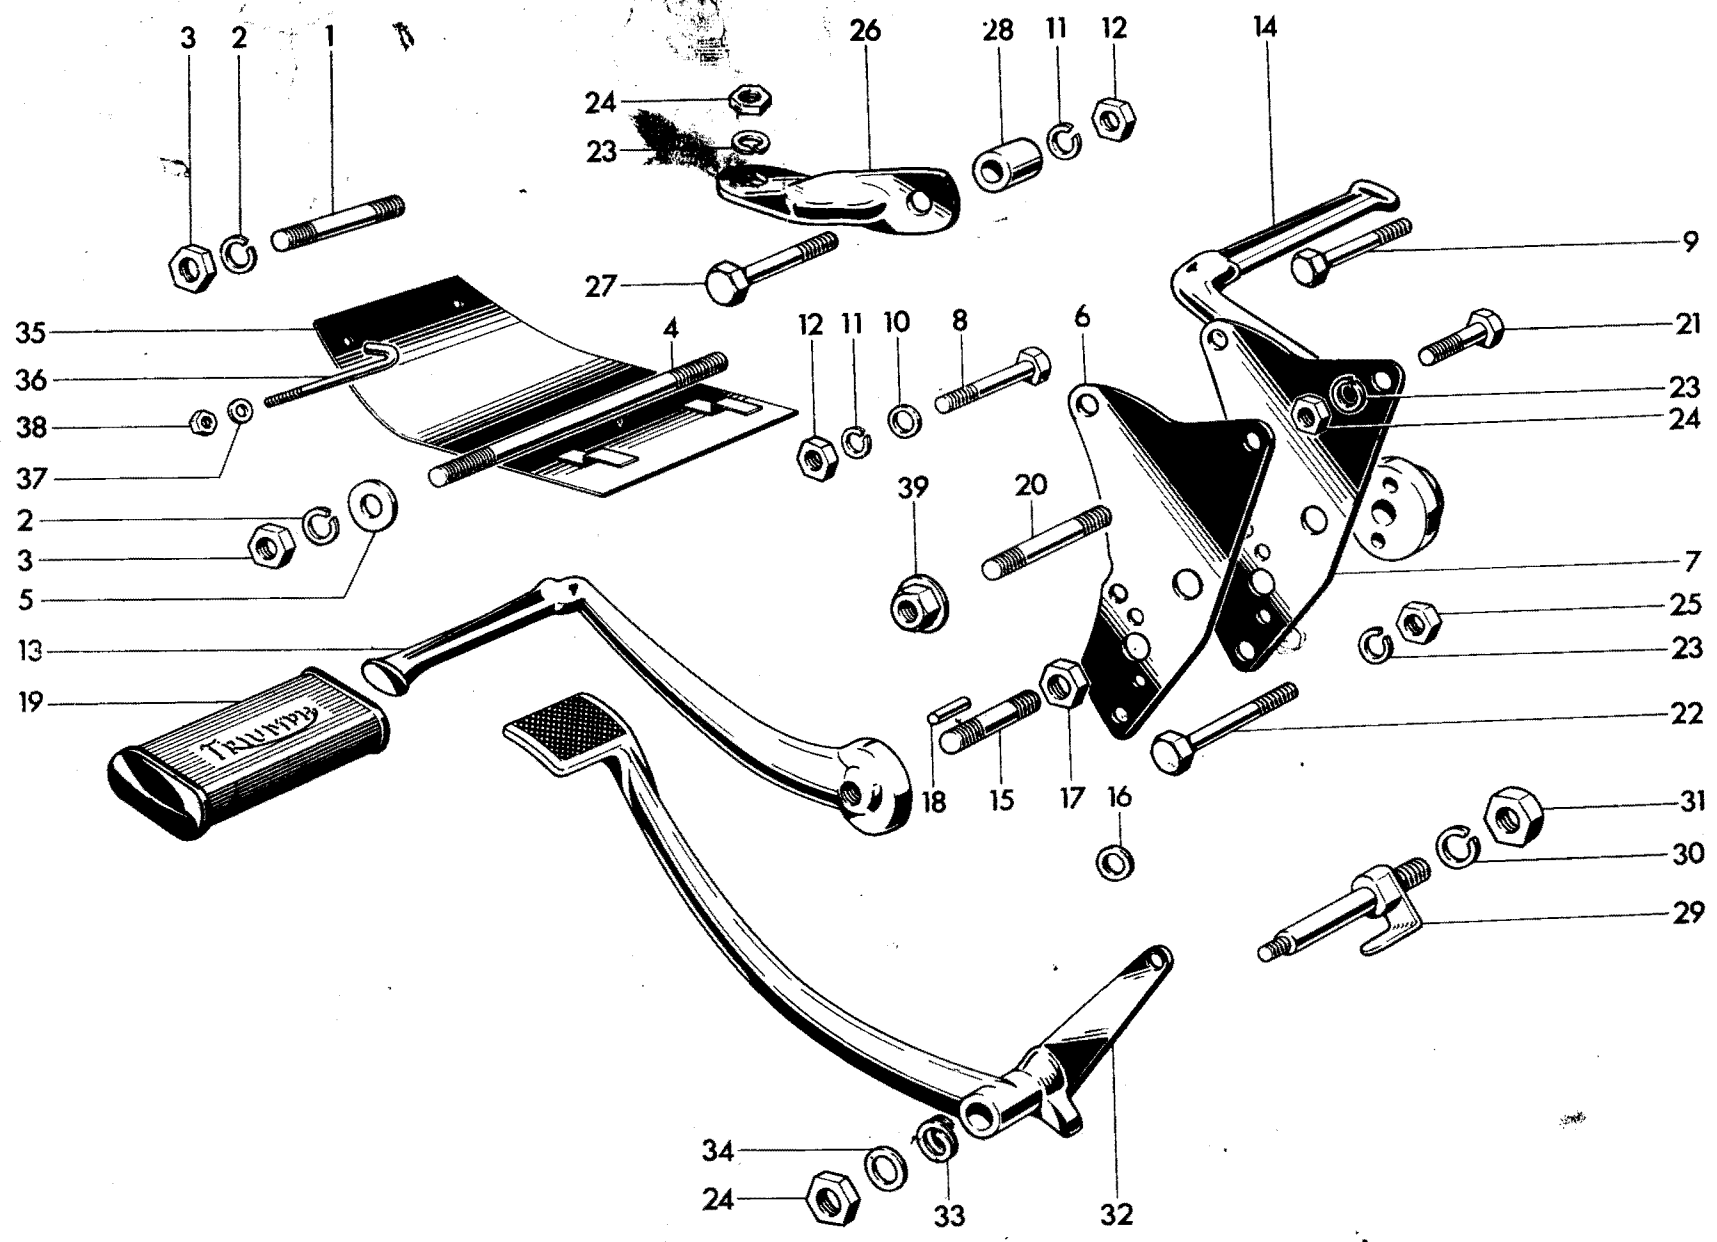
ENGINE UNIT FITTINGS AND FOOTRESTS
